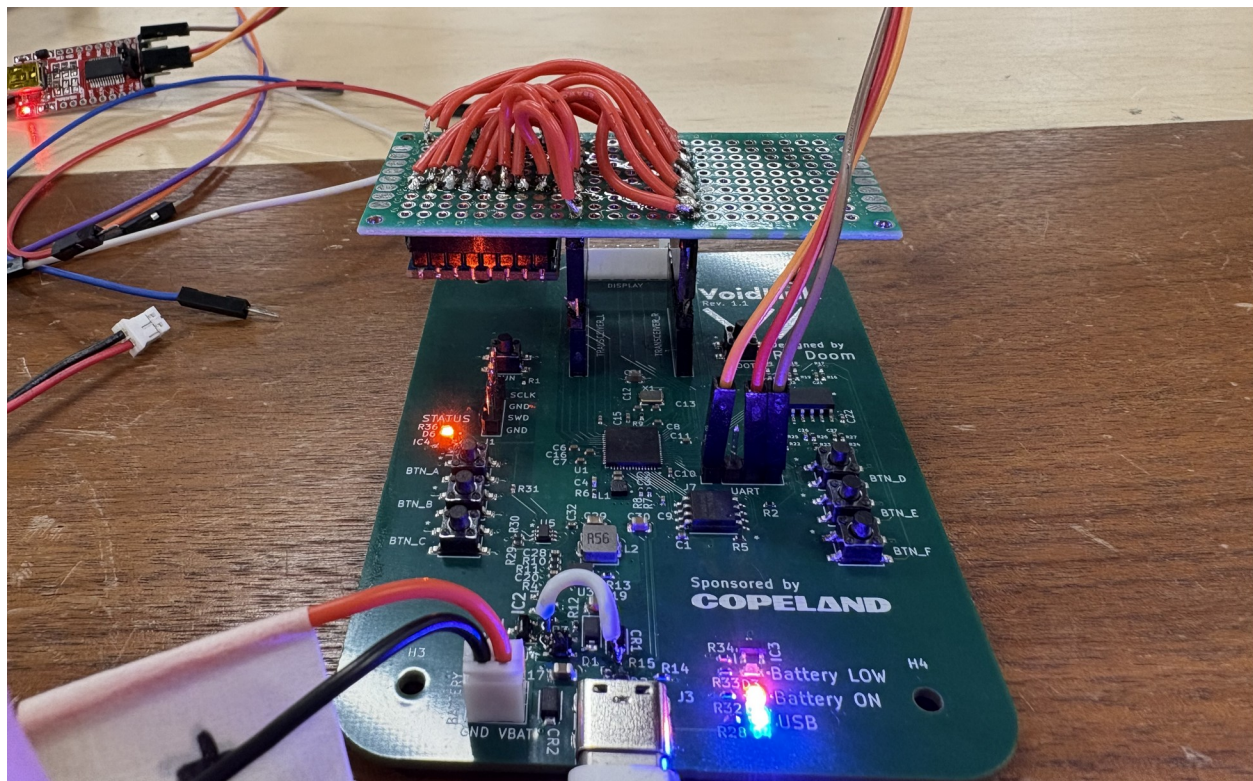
PCB Revision 1 with Manual Soldering Fixes
